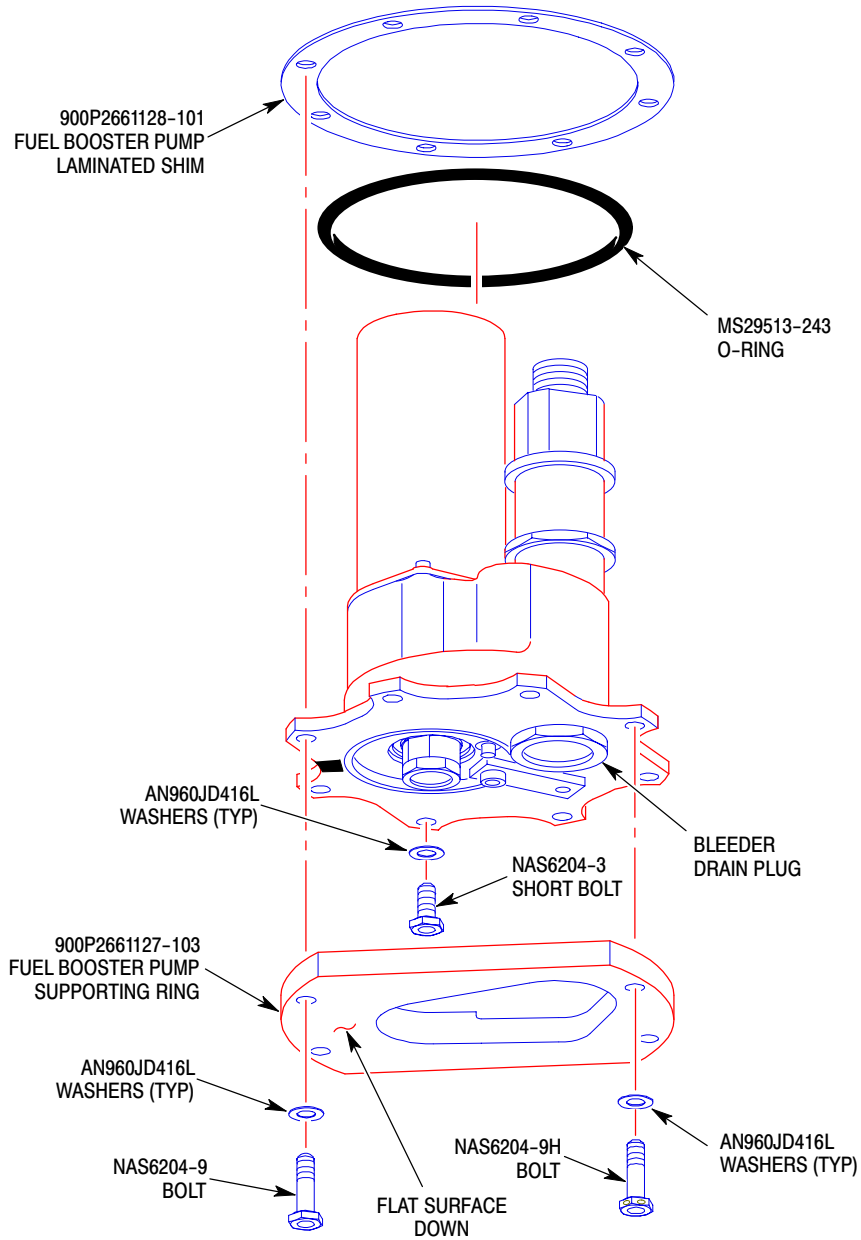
Reinforcing Fuel Booster Pumps Mounting Flange (Sheet 1 of 2)
